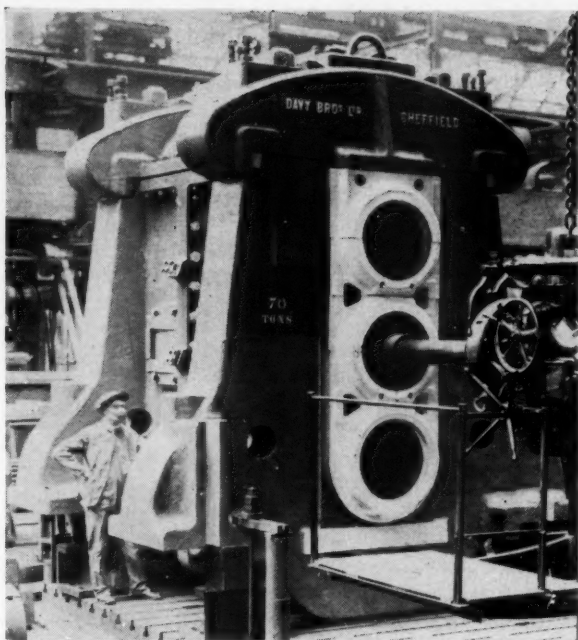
PINION HOUSING, IN HALVES, AND HOUSING CAP. TOTAL WEIGHT, 70-TONS.
